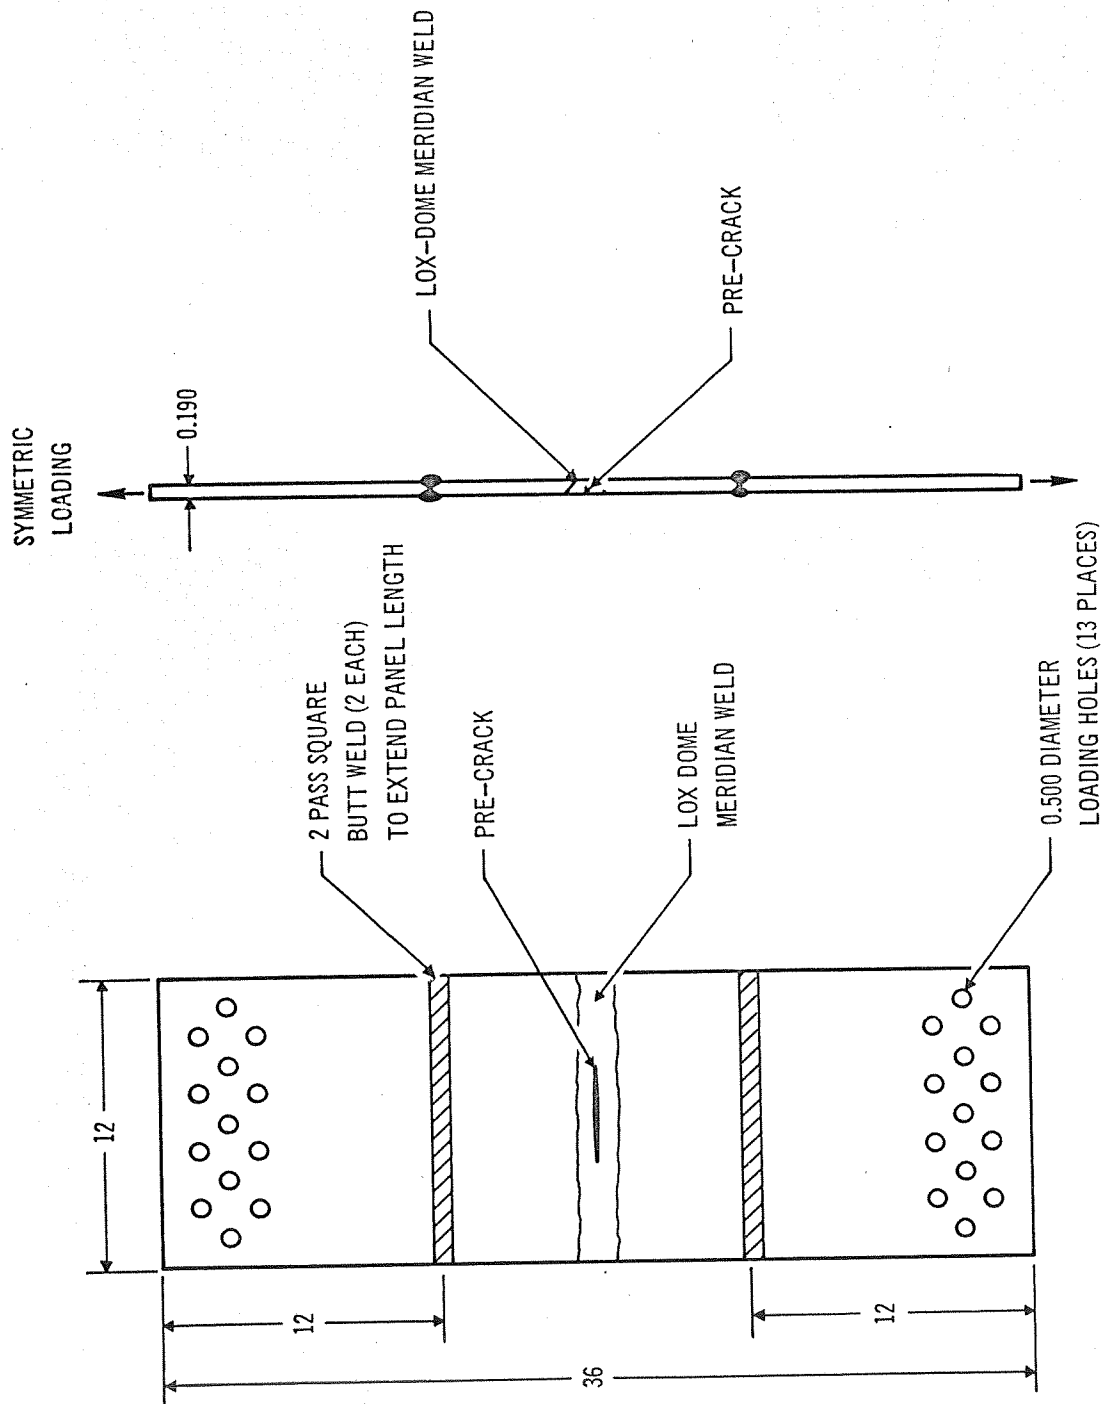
Twelve-Inch Wide Uniform Thickness Specimen
